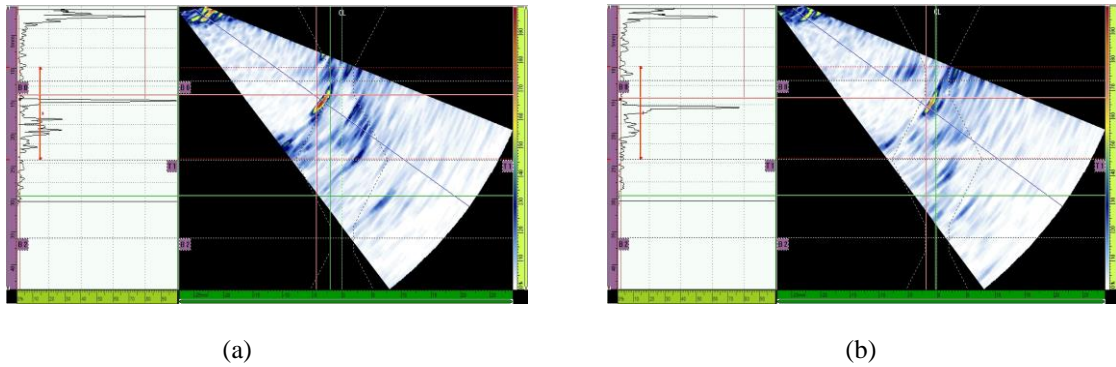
Sectorial scan of weld in sample 3 (a) at the starting of weld and (b) at the end of weld
